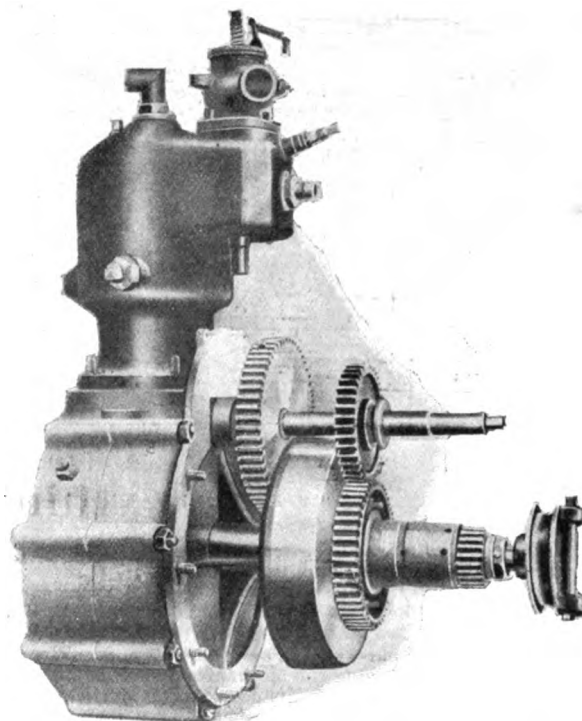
The Newmobile Combined Engine, Clutch, and Change Speed Gear.
